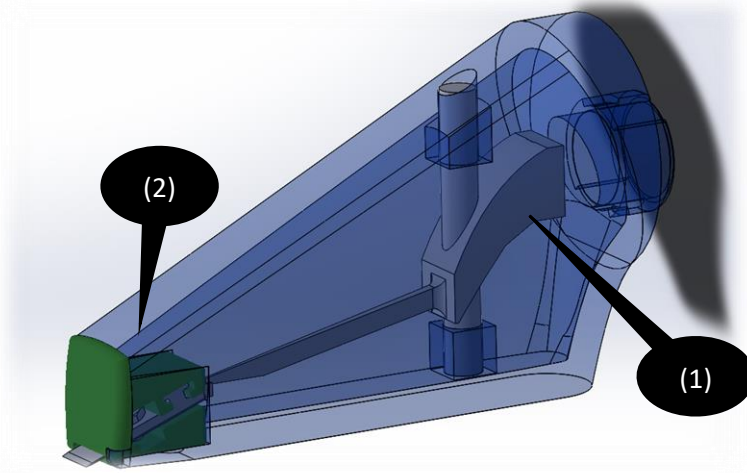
Designing for Assembly Failure, part (1) is too big to go through part (2)
